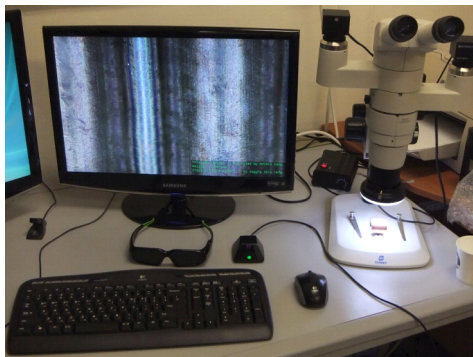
Realized automatic inspection system for metal bellows welding
